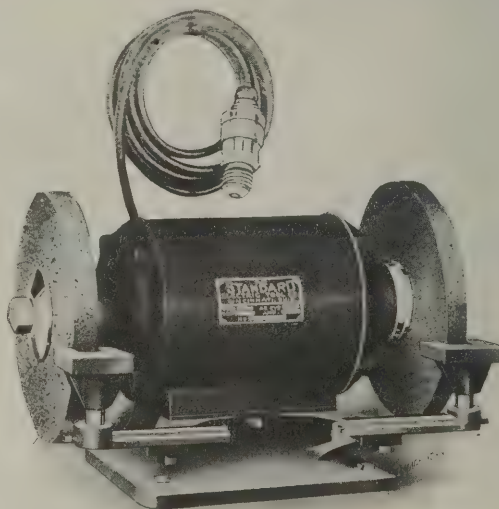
Grinder shown in Fig. 2 converted into Bench Grinder
